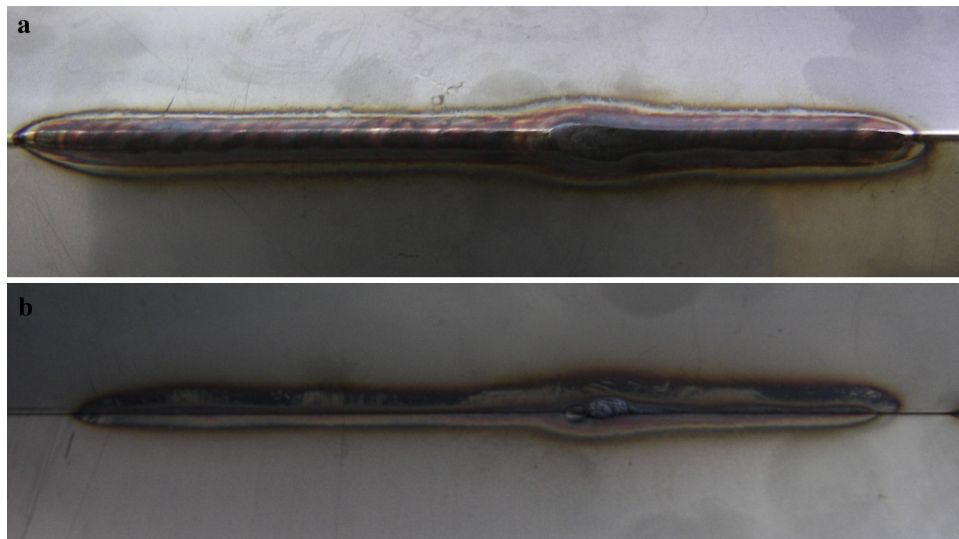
Stainless steel sheets after the welding. Top view (a) and root view (b) on the weld.
